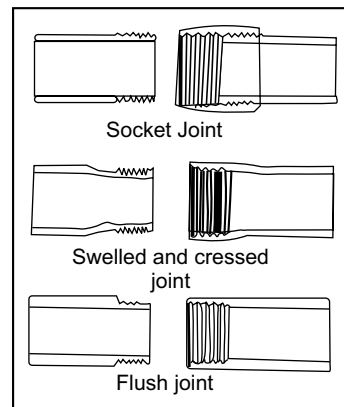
Types of joints for boring pipes (4 threads/cm in all joints)
